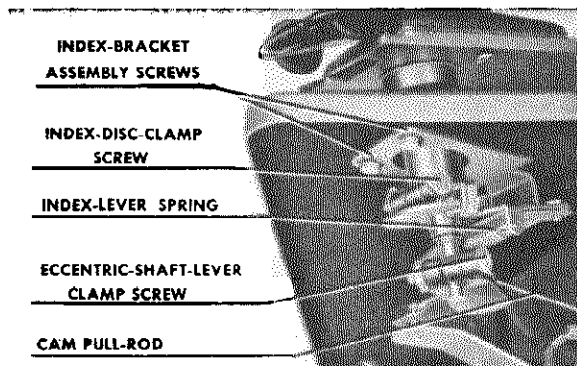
INDEX-BRACKET, INDEX-DISC, AND ECCENTRIC-SHAFT-LEVER ASSEMBLIES.
